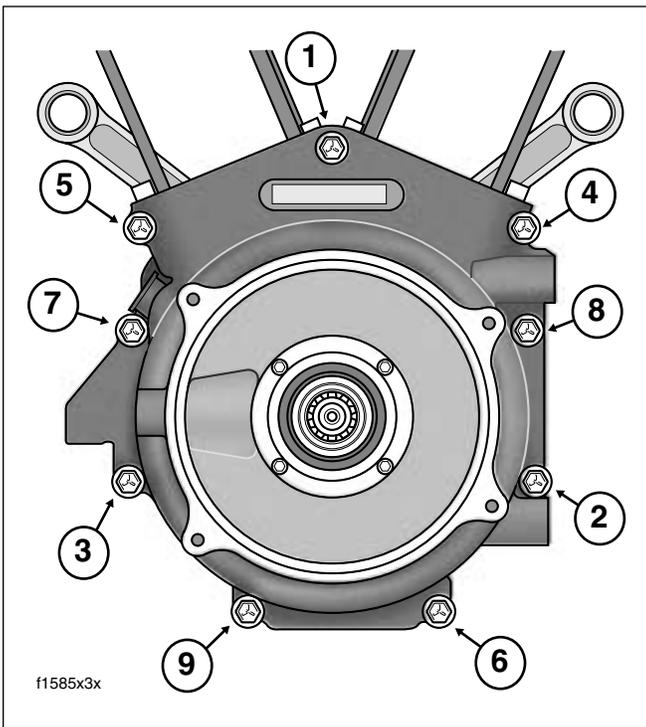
Crankcase Torque Sequence (Left Side View)
